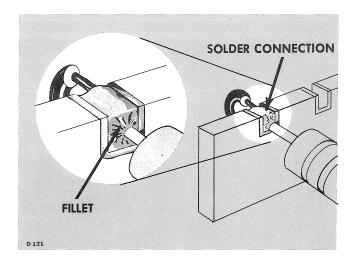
A slight fillet of solder is formed around the wire when heat is applied correctly.
